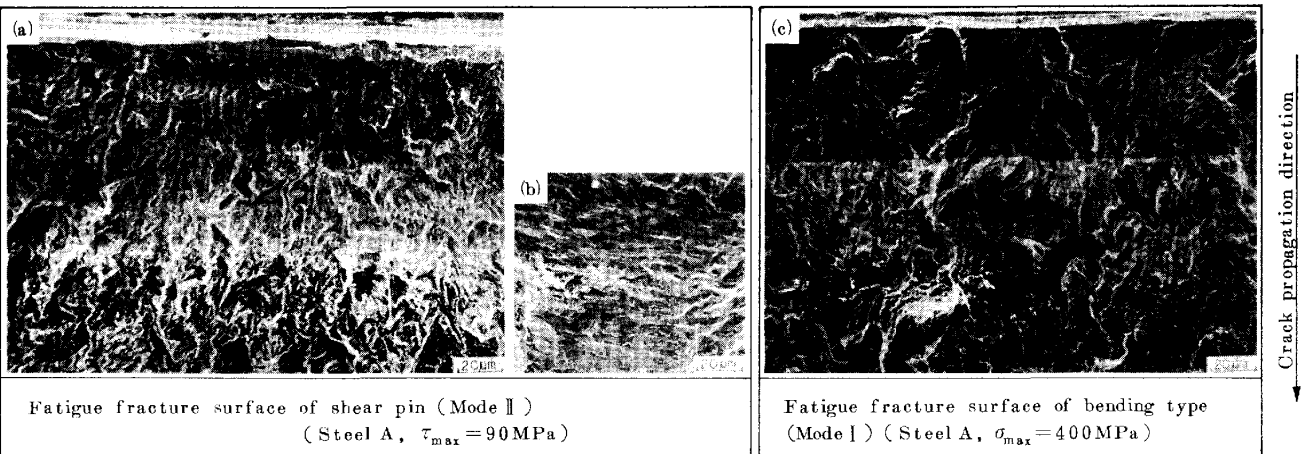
Comparison of fatigue fracture surface between shear Pin (ModeⅡ) and bending type (ModeⅠ)
